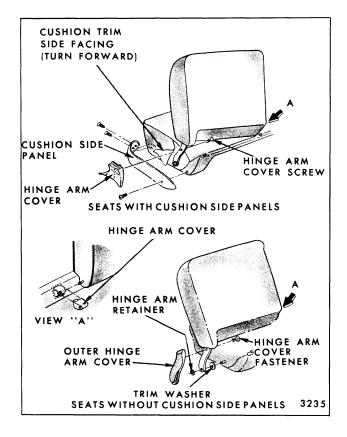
Seat Back Attachment - Two-Door Style Full Width Seat
